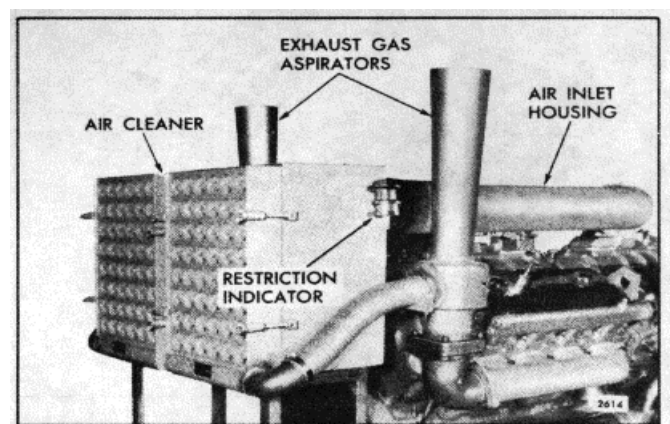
Typical Dry Type Air Cleaner Mounting
